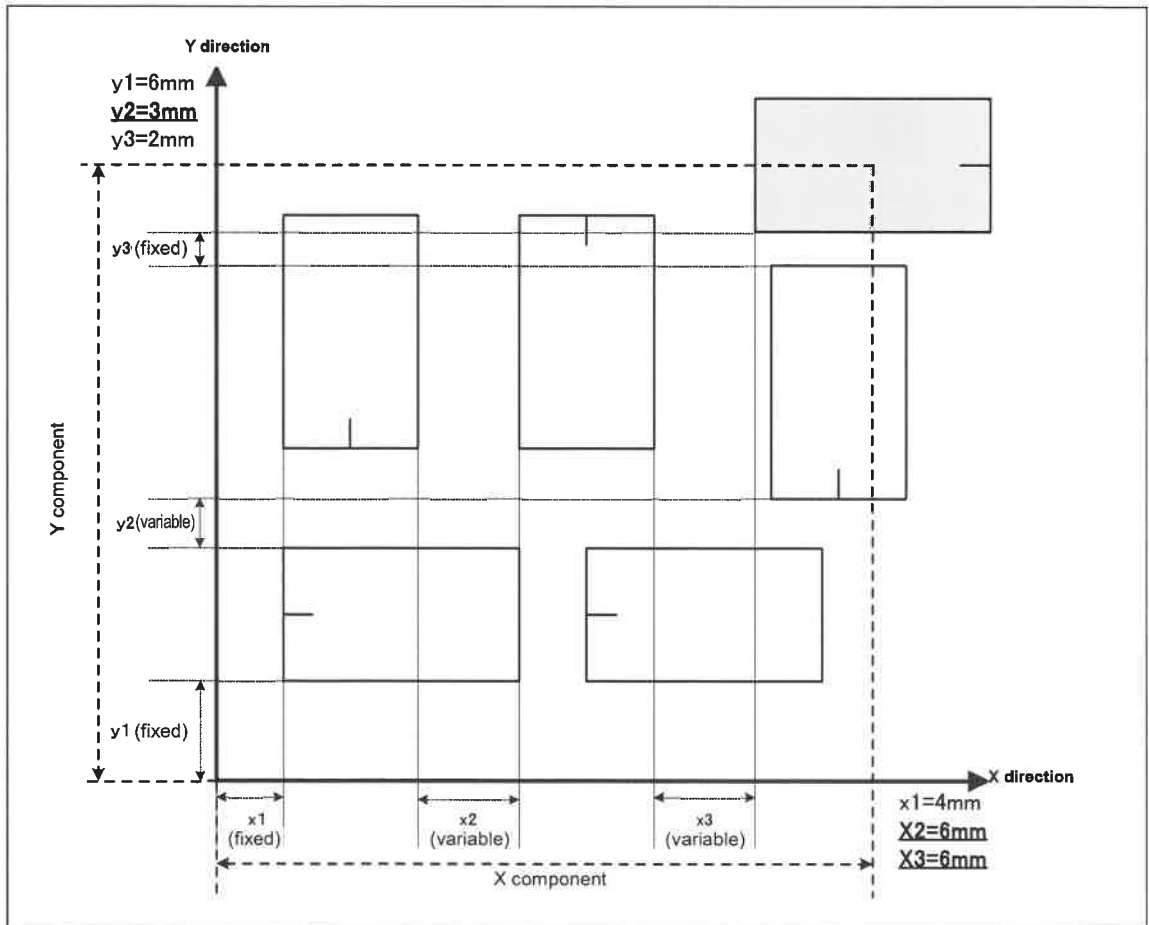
Defining the workpiece locations when both fixed and variable gaps are provided between the workpieces
